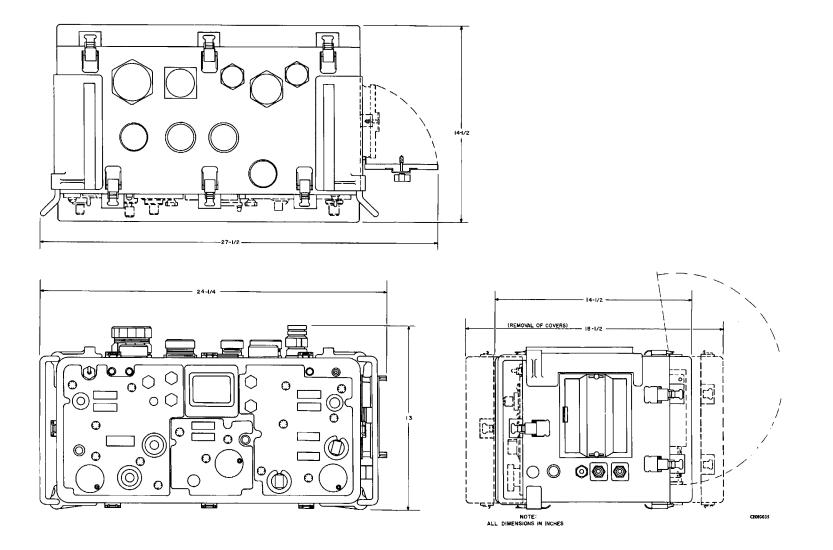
Radar Set Control C-2715/TPS-25, dimensional Drawing.
